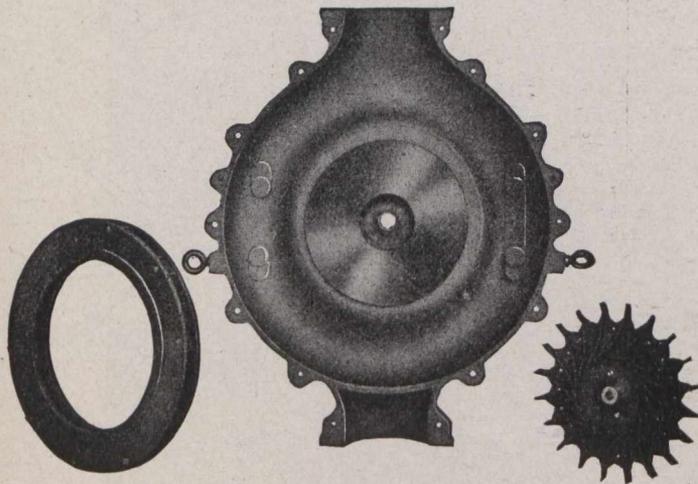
Impeller, discharge vanes, and half casing of Single Stage Compressor
